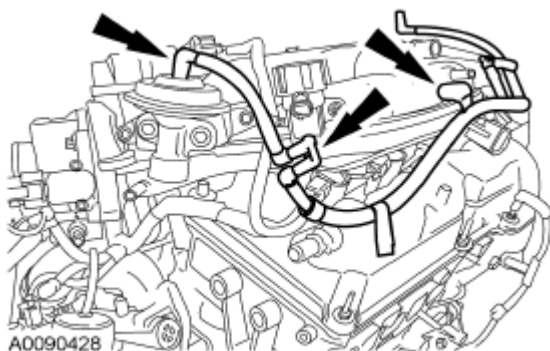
Locating Vacuum Tube Fittings From EGR Valve
